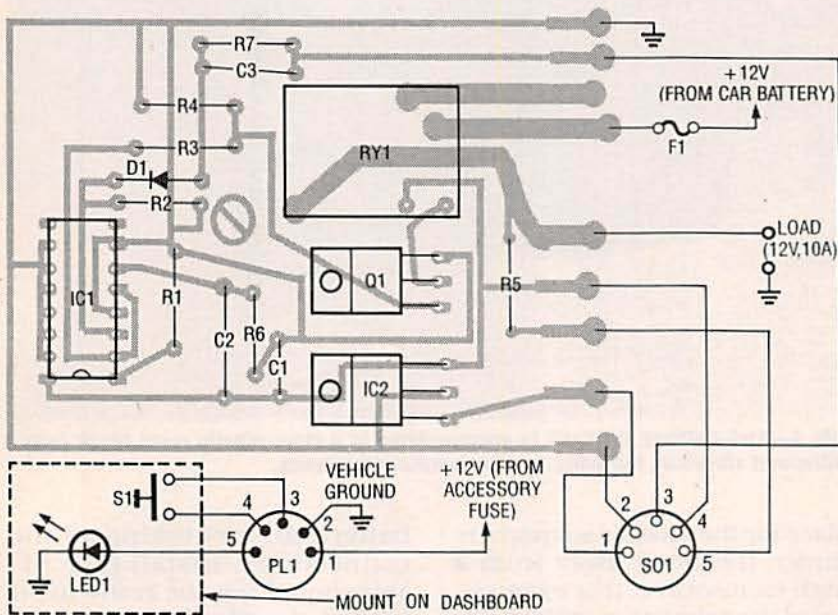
ALL OF THE PARTS mount on a single-sided PC board for which we've provided the foil pattern.
